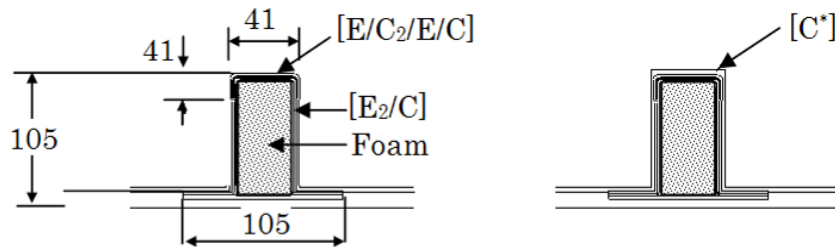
Cross-section details of the stiffeners on the deck panel (after [120])
